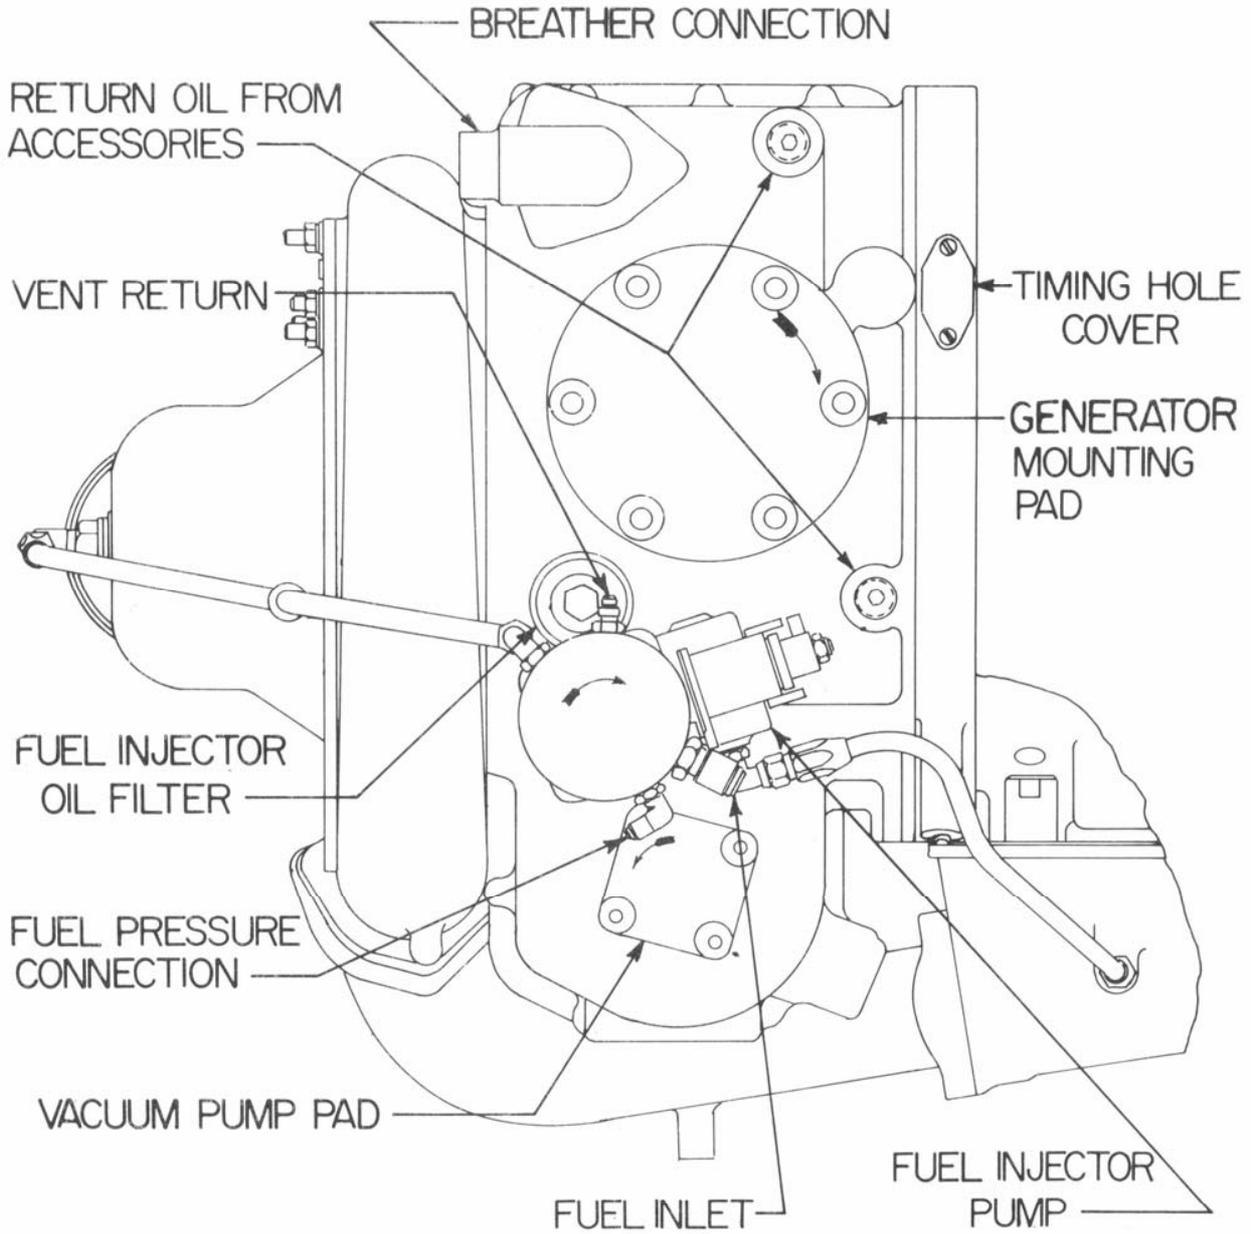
Installation Drawing – Typical IGO-540-B Series –
